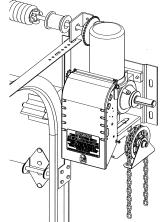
Right Side Wall Mount with BRACKET112 (Chain Hoist on Right)
